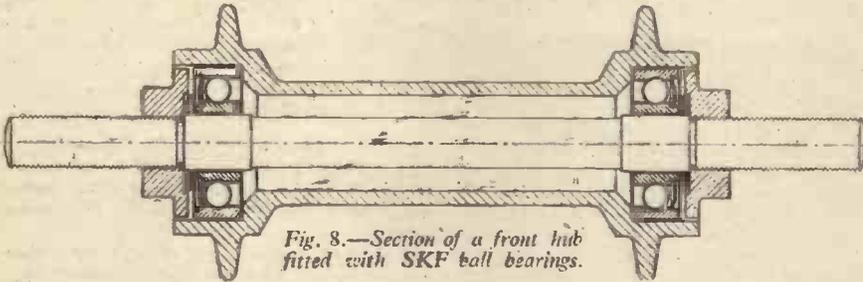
Section of a front hub fitted with SKF ball bearings.
